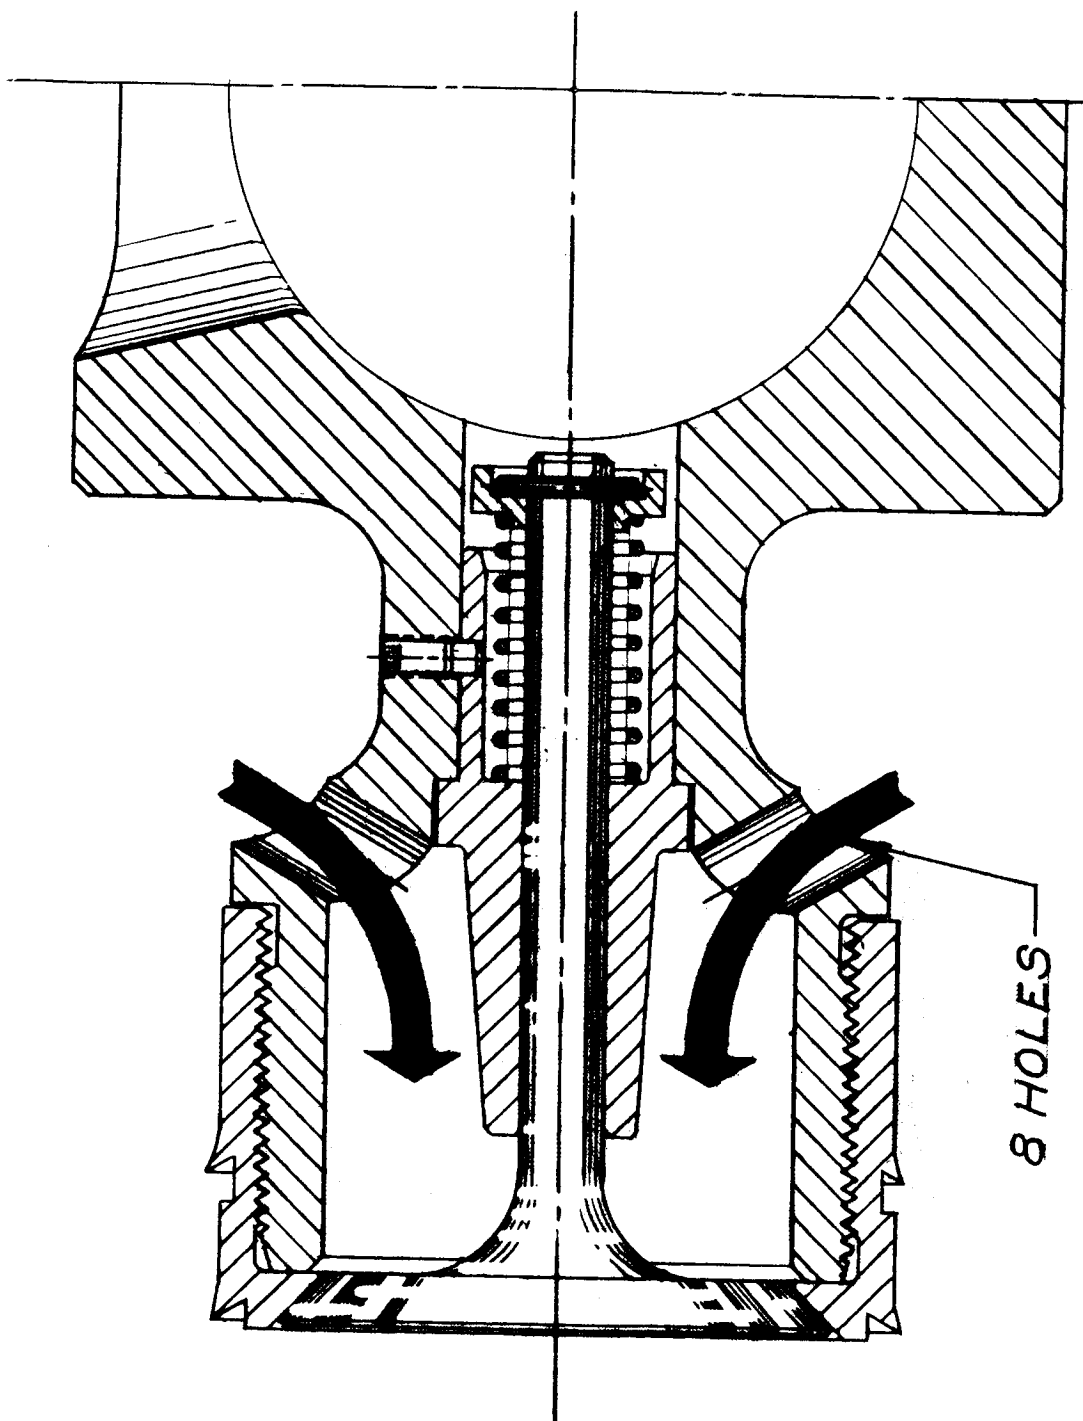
Spring Loaded First Stage Inlet Valve-in-Piston
